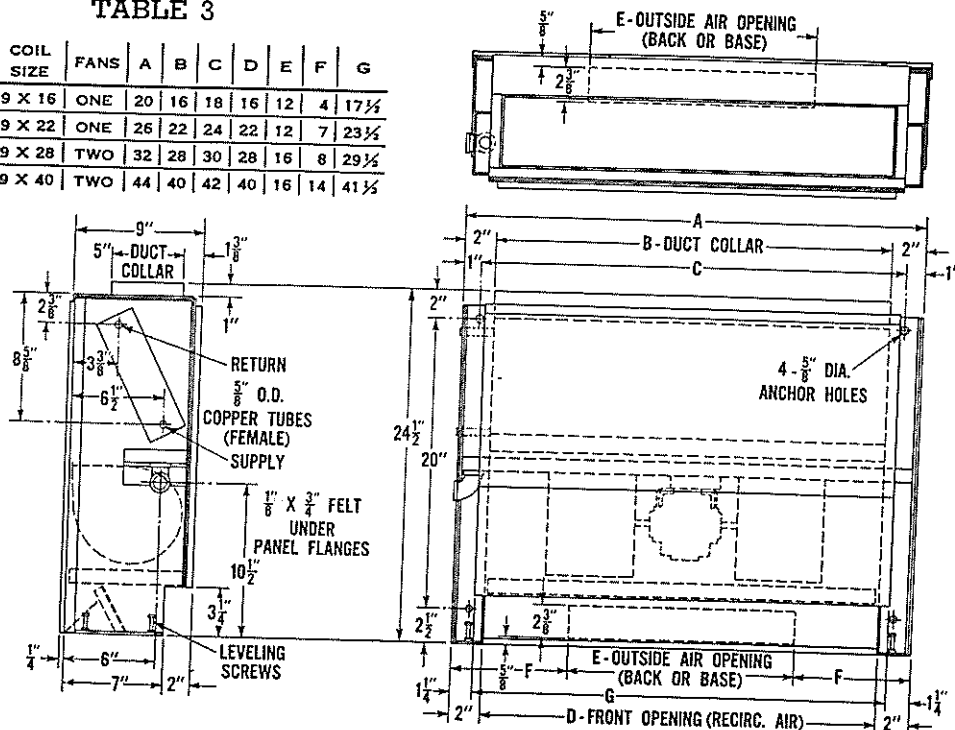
Dimension Drawing of UniTrane Vertical Concealed Model
